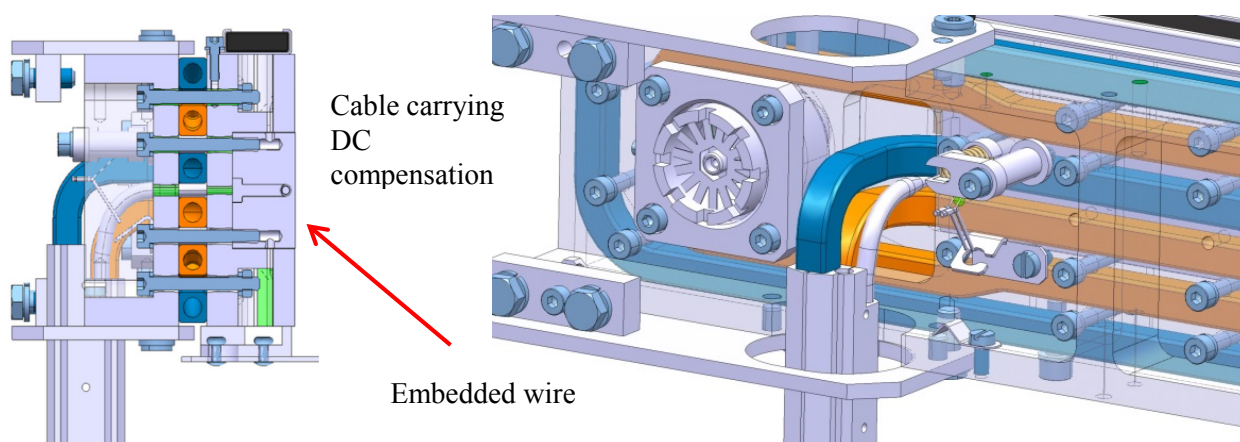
Technical drawing of the wire-in-jaw collimator design
